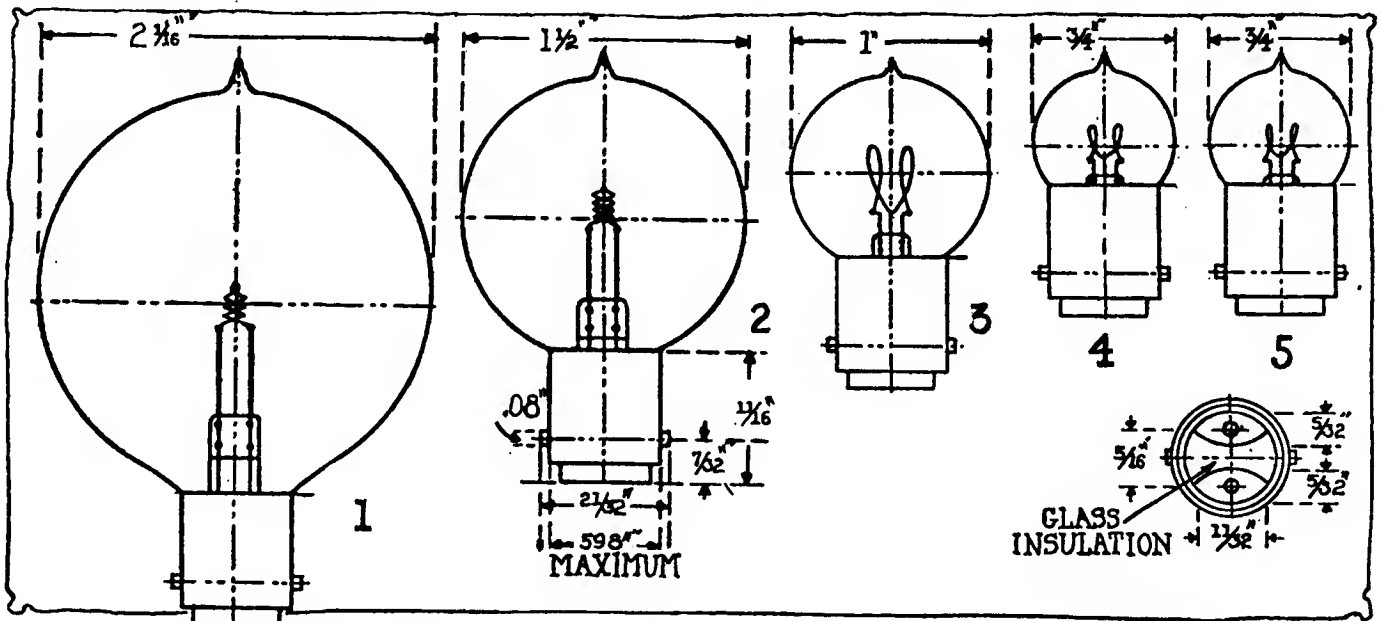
Actual size of lamps now in use, showing the full size dimensions of the bulb and sockets
